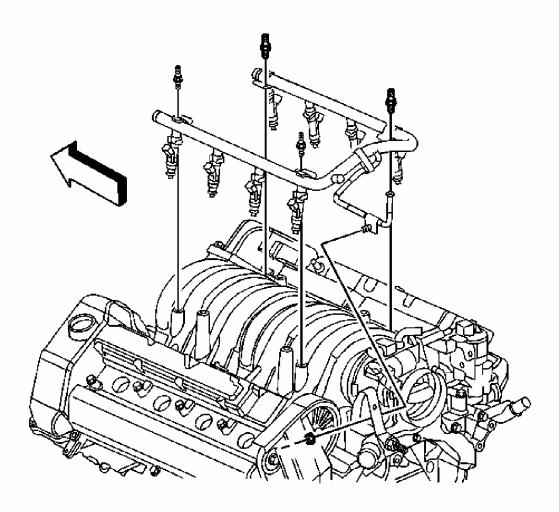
View Of Fuel Rail, Bracket & Bolts Courtesy of GENERAL MOTORS CORP.
